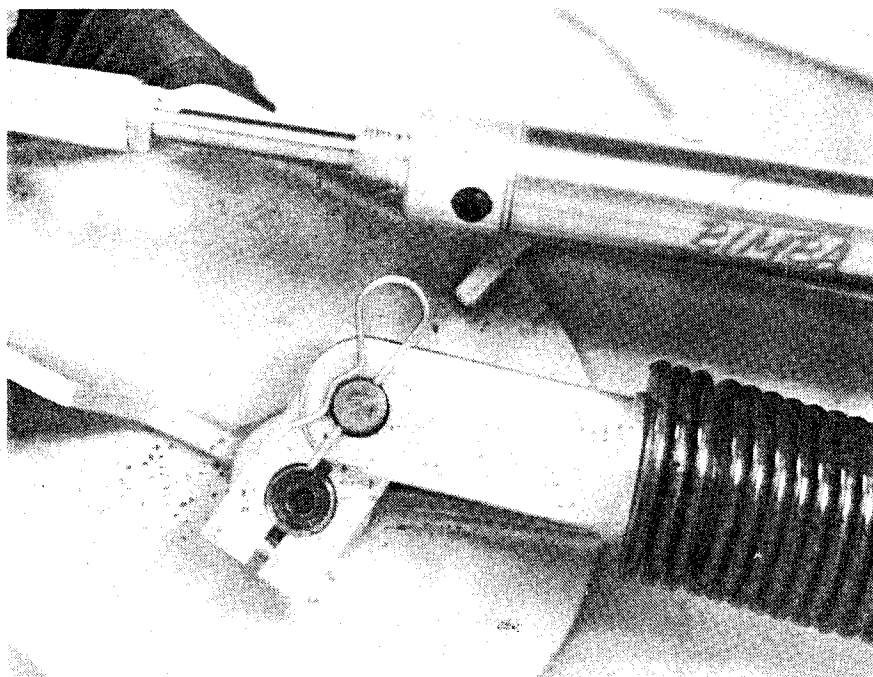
Incorrect Installation of Mainspring Retaining Pin.
